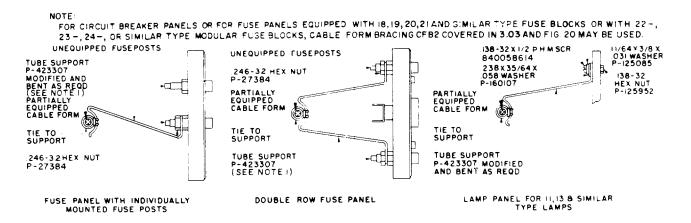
Supporting Cable Forms at Partially Equipped Fuse, Circuit Breaker, and Lamp Panels
